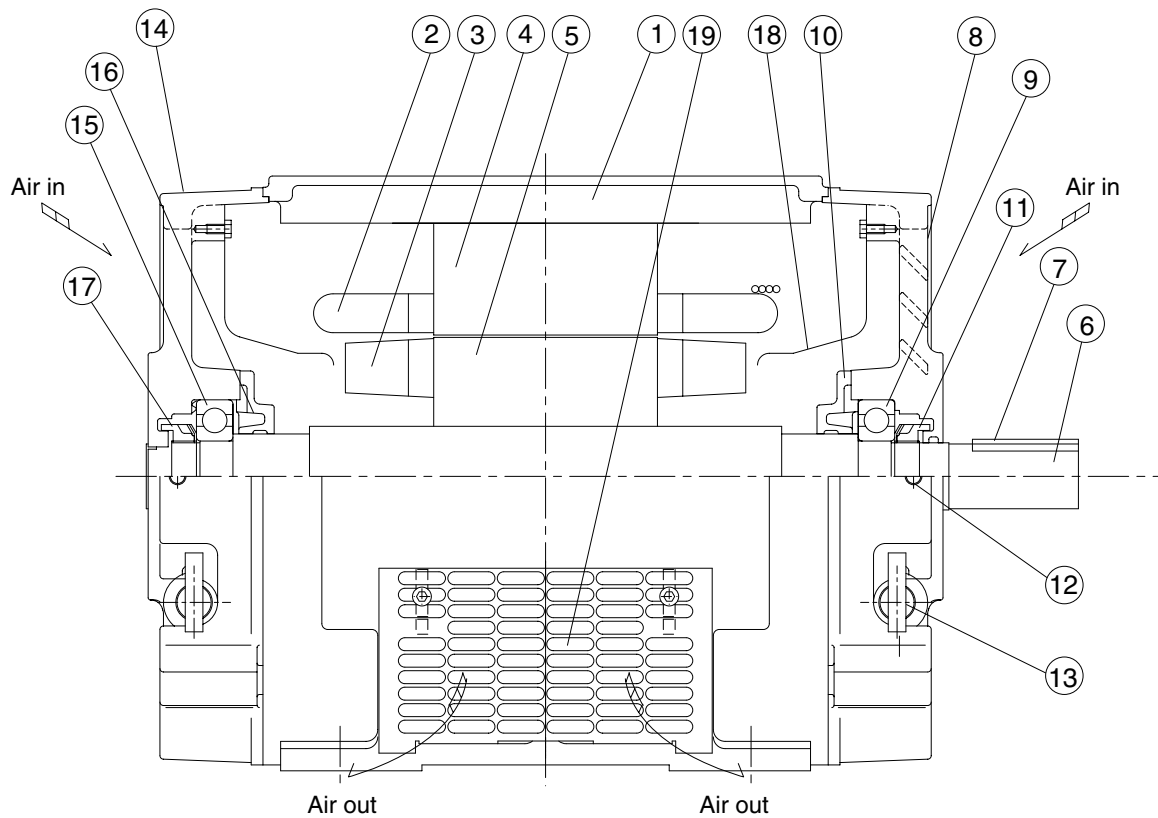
Section Drawing of Horizontal foot mount (Frame size 250S~315L)
